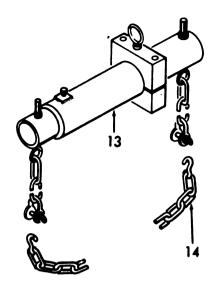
Special tools and equipment (sheet 1 of 3).
